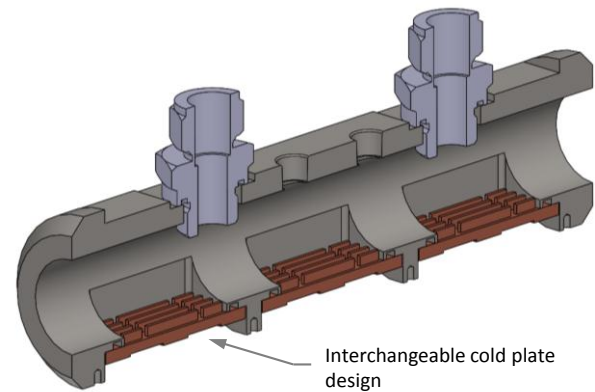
Cross-sectional view of the evaporator that incorporates an interchangeable cold plate design.
